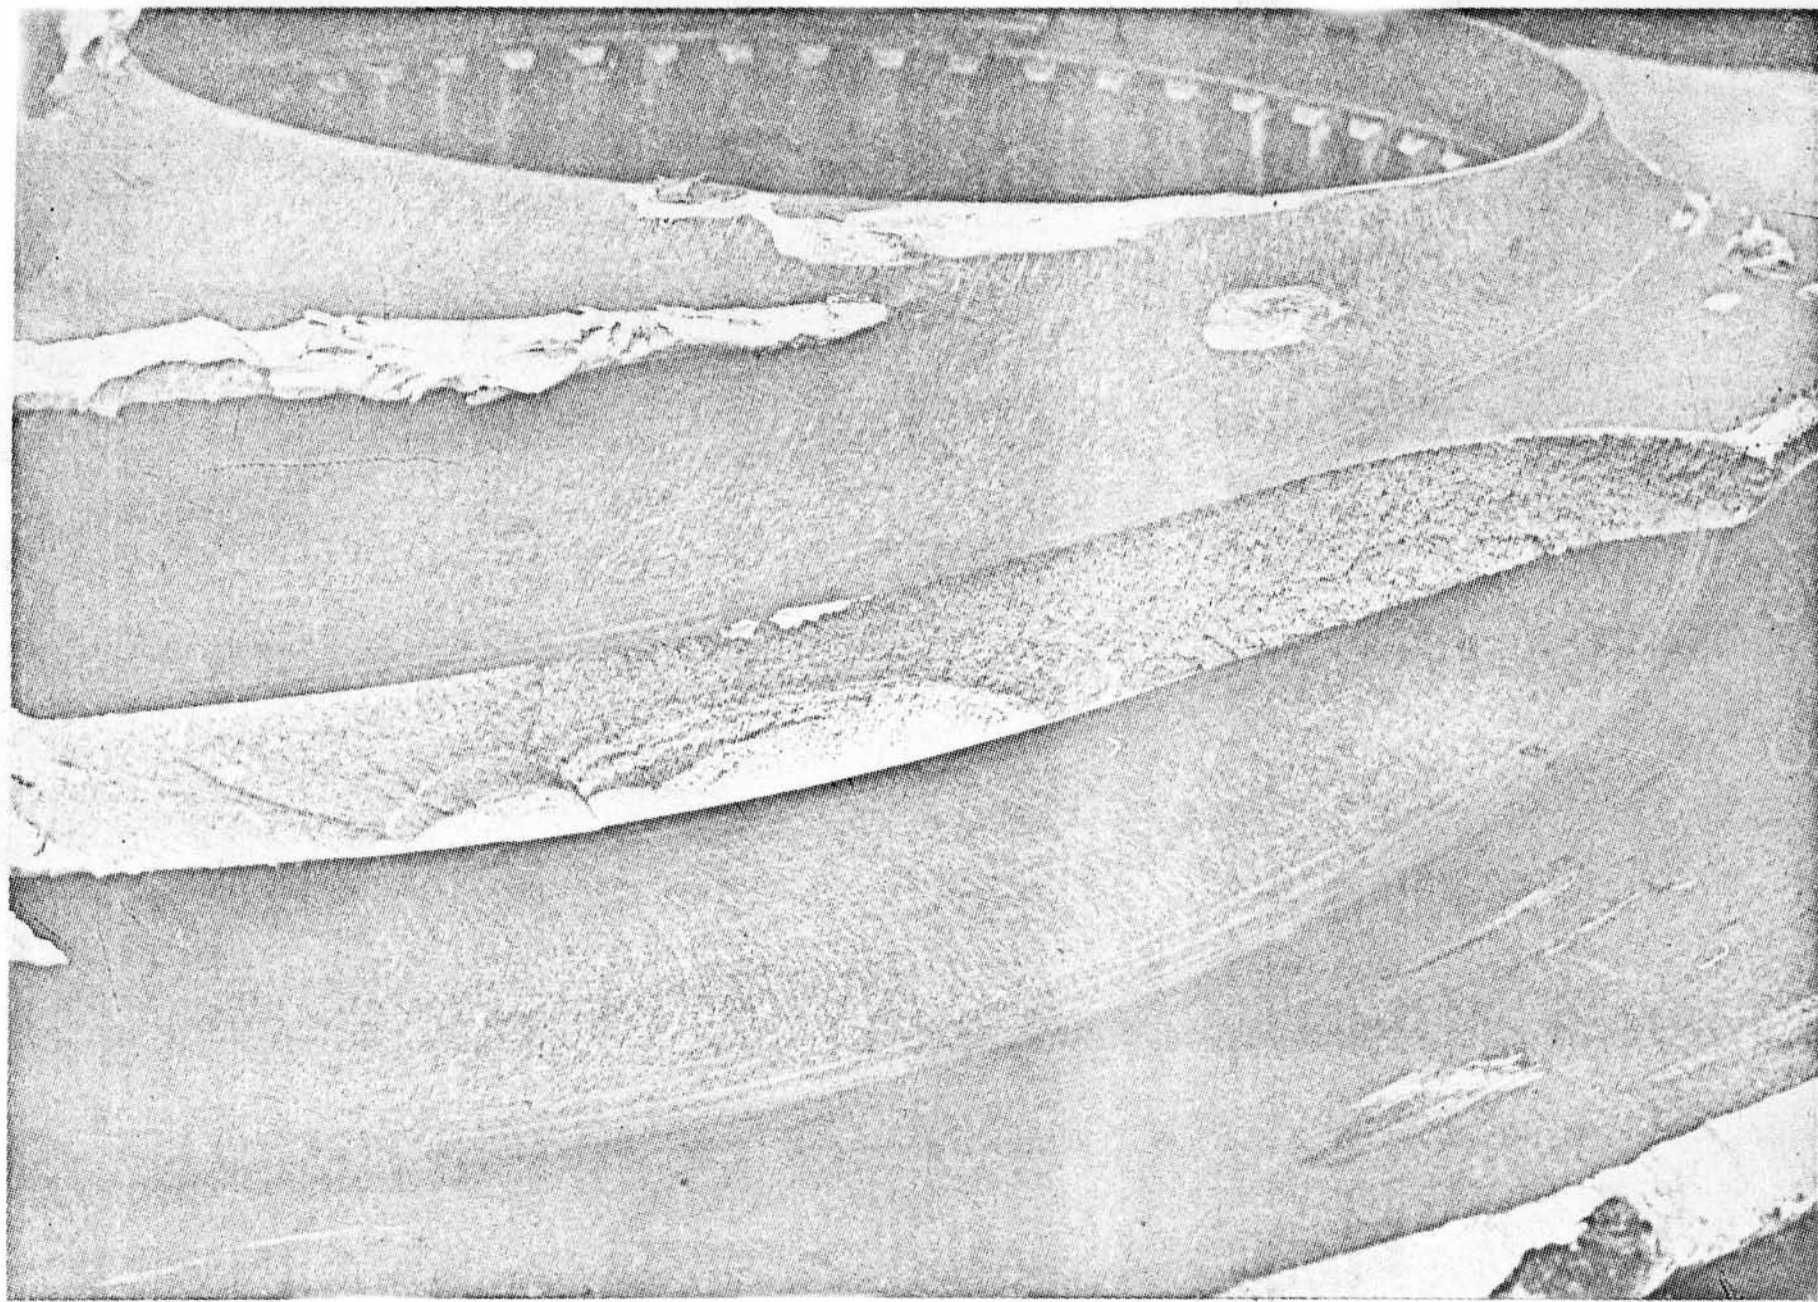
Fatigue Beach Marks on Inducer Blade IX
